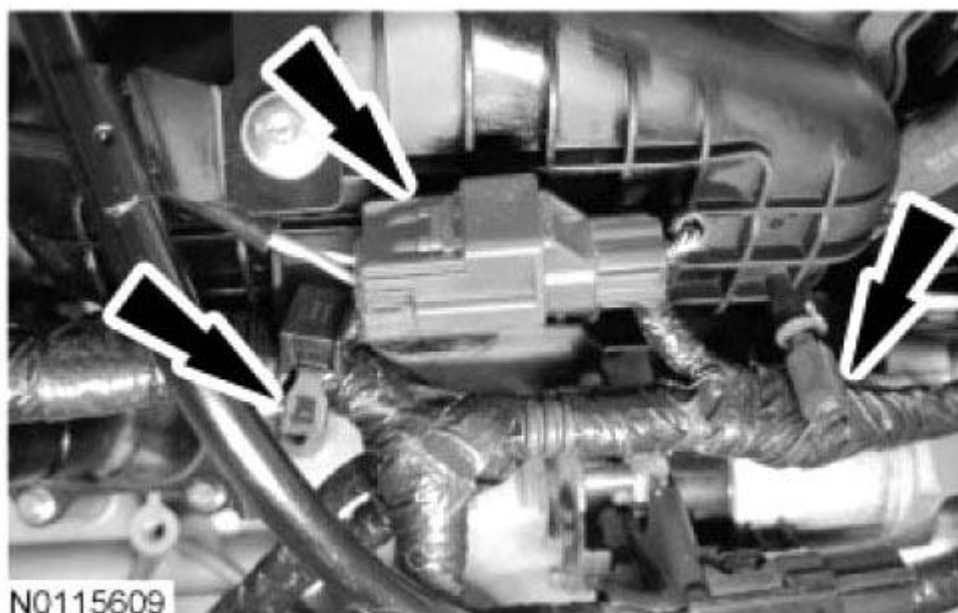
Locating Wiring Harness Retainers From Intake Manifold
